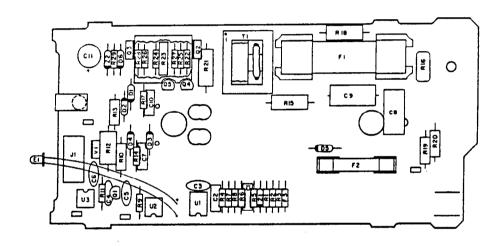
831 SCR Control Board Layout (4-20mA-PA Input Version)
